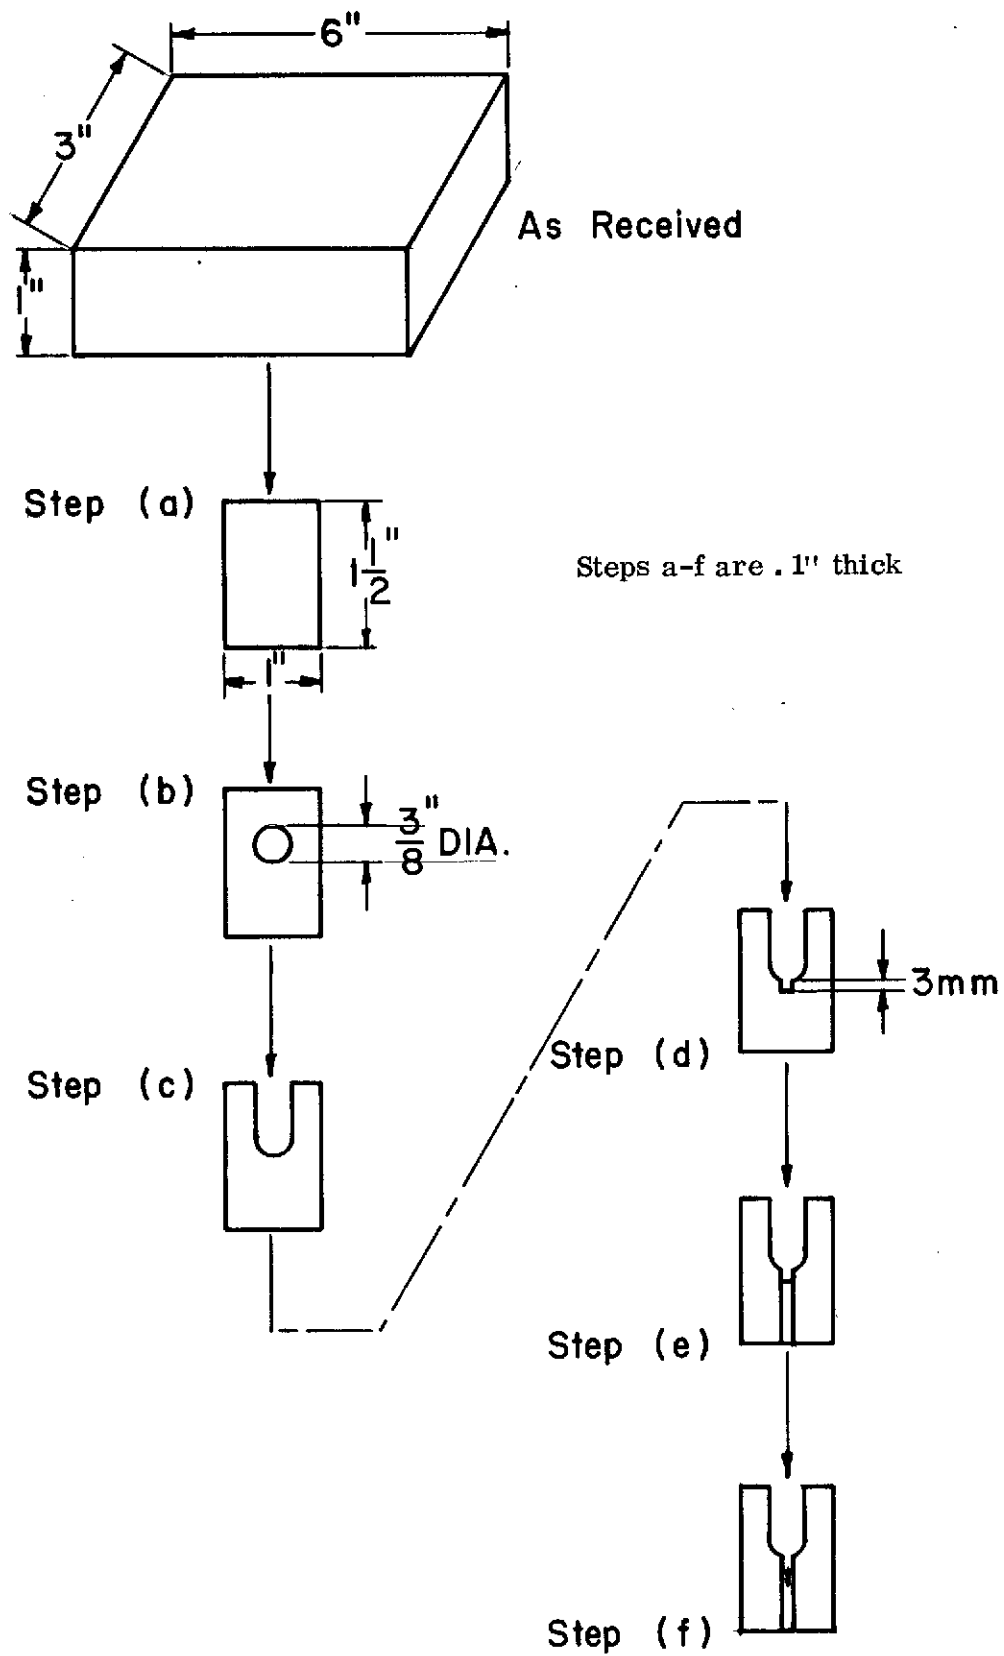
Machining sequence for modified form of fracture specimen
